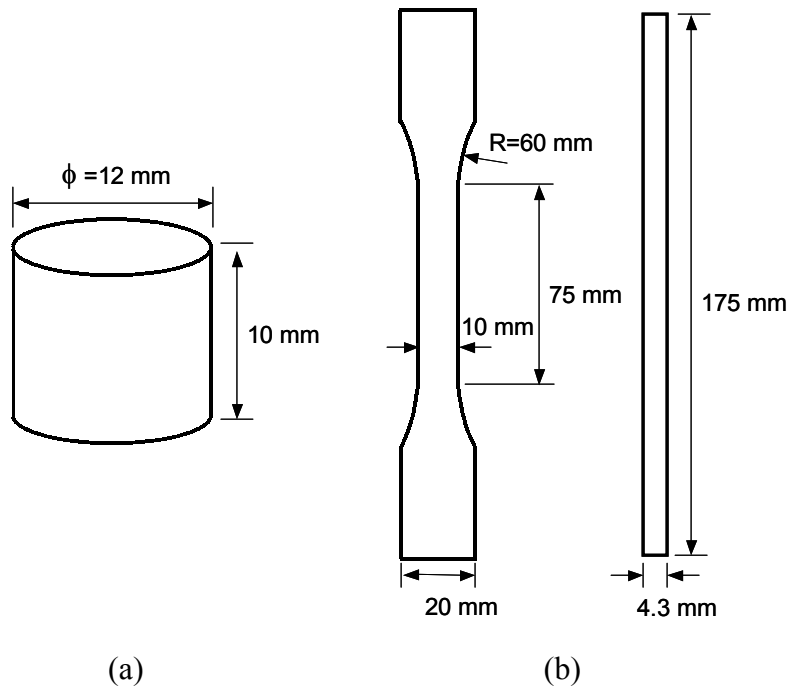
Dimensions of tensile and compression specimens. (a) Cylindrical compression specimen. (b) Coupon tensile specimen.
